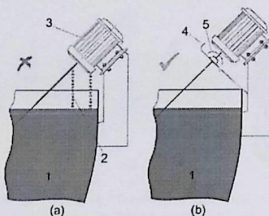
(a) A motor and cabling mounted over any exposed product (1) can contaminate it by soil, condensate or lubricants (2). (b) The motor drive (3) and power line should be placed beside the equipment. A self-draining protection sheet with "upstand" (4) in combination with a cowl (5) on the shaft must exclude any food safety risk. The bottom side of the thrower ring (cowl) should be made inspectable (Lelieveld et al., 2003; Hauser et al., 2004b)
